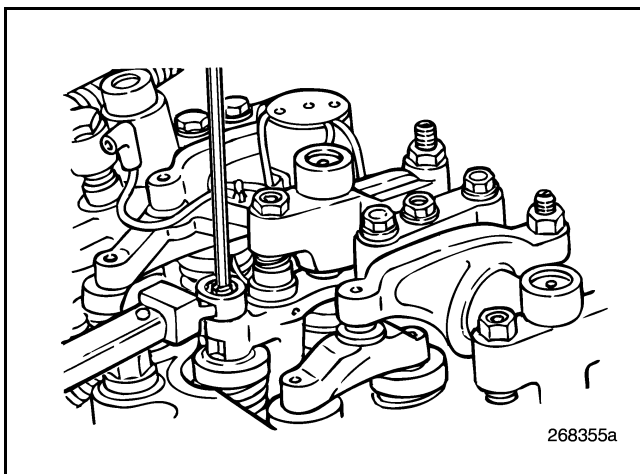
Loosening Exhaust Valve Yoke Adjusting Screw Locknut
